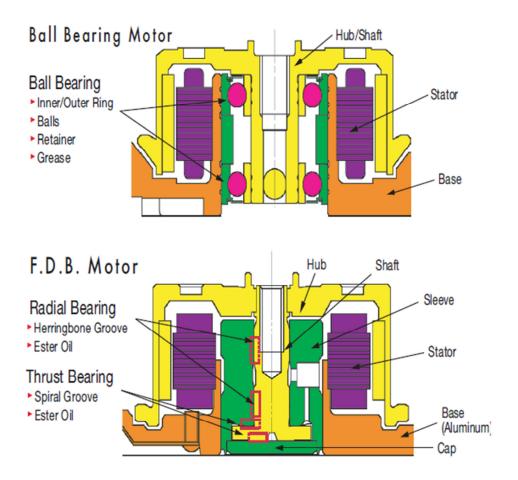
Ball bearing spindle motor and FDB spindle motor (HGST, 2012)
